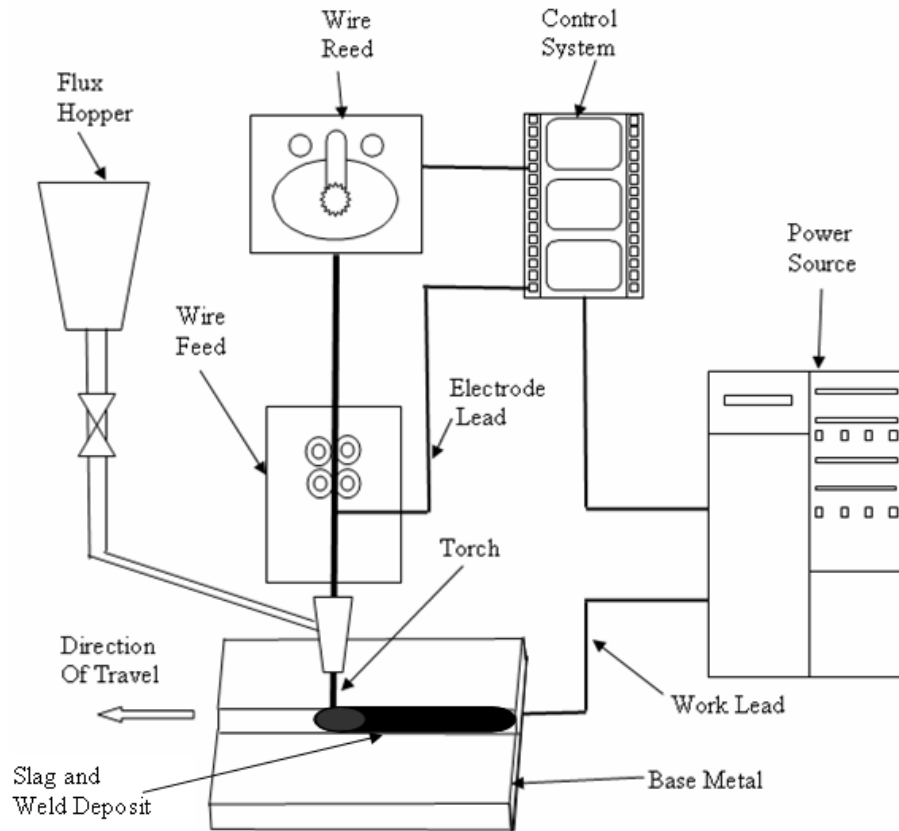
Equipment setup for single wire submerged arc welding process (adapted from [21]).
